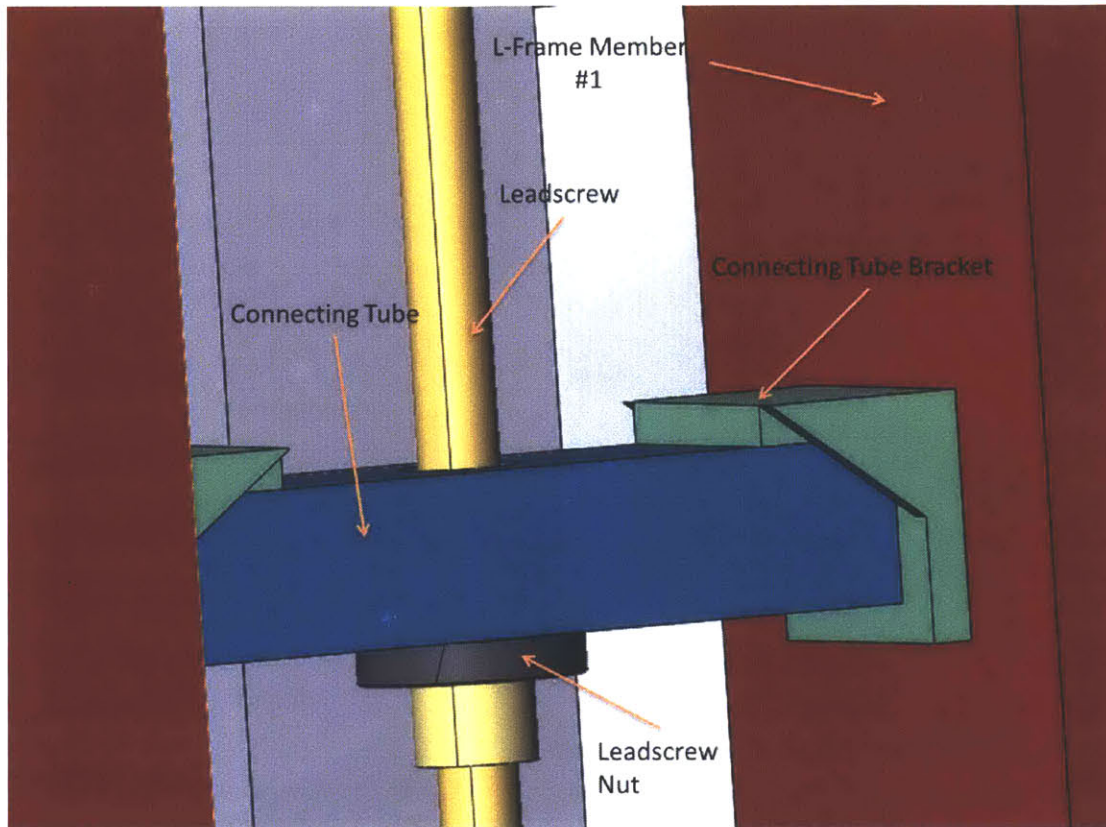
Connecting Tube Assembly: The Connecting tube is a .2540m x .0762m x .0191m tube that allows for the load from the L-frame member 1 to be transferred to the Leadscrew. The Connecting Bar will be attached to the lead screw nut using fastener. In order to transfer the load from the leadscrew to the L-frame member; the connecting tube brackets are introduced. The connecting tube pushes up against the connecting tube bracket as the nut moves up. As the nut pushes up against the connecting tube bracket the motion and forces will be transferred from the connecting tube bracket to the L-frame member because the connecting tube bracket will be fastened to the L-Frame member 1. It is important to recognize that the connecting tube brackets are not fastened to the connecting tube in order to avoid over constrain the system.
